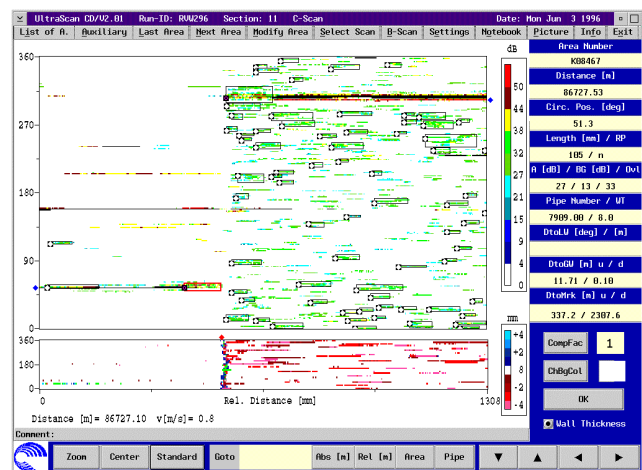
C-scan showing a pipe joint relatively free from inclusions (left-hand side of the scan) followed by a joint full of inclusions (right-hand side). Boxes indicate reflectors identified by the system to comply with certain preset criteria. Girth weld is visible in the lower box of the scan.
